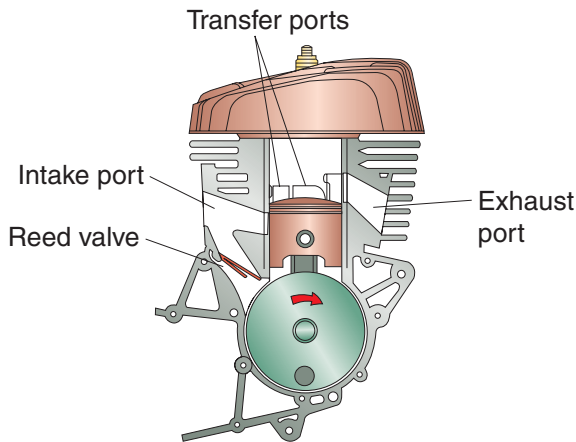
The location of the reed valve in a piston port/crankcase reed induction system.
